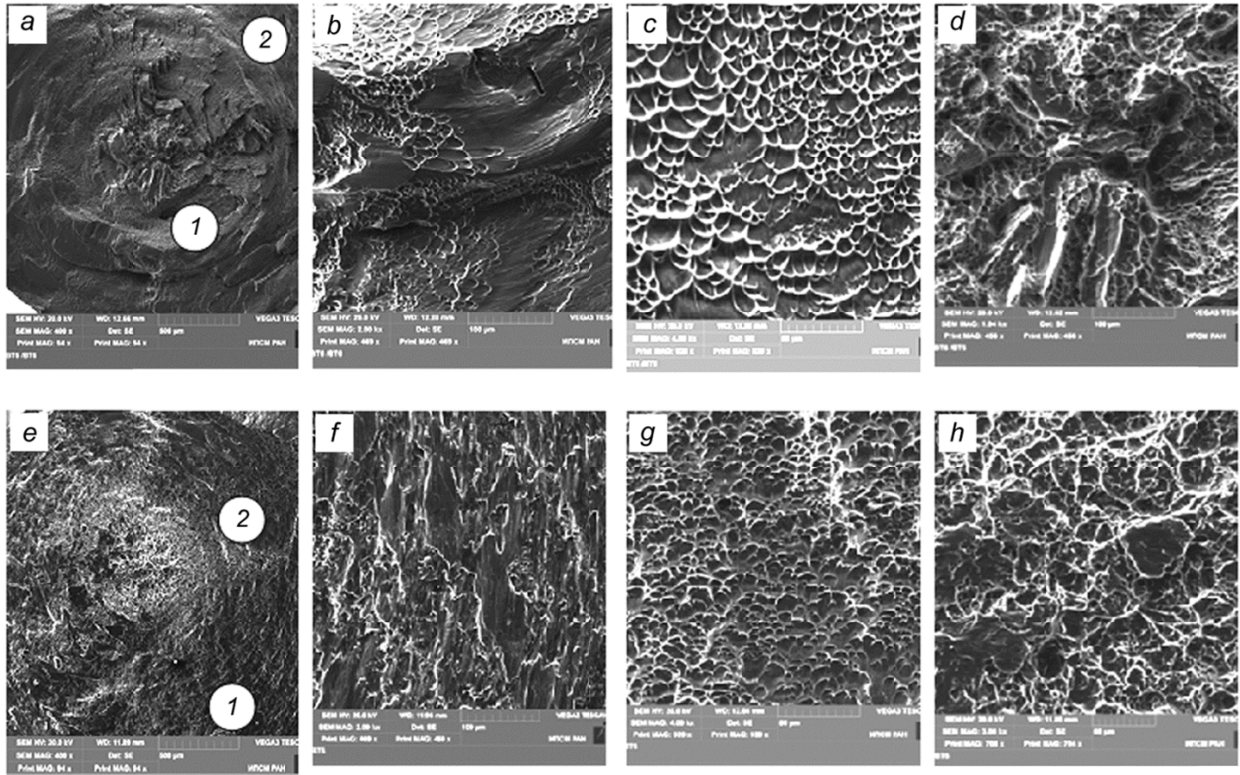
Fractograms of the zones of the fracture center (*a* and *e*), viscous component (*b* and *f*), and final failure (cut) (*c* and *g*); external view of the final failure zone of the VT6/VT6 joint (*d*) and of VT6 (*h*). Here *1* indicates the final failure zone and *2* indicates the fracture center.
